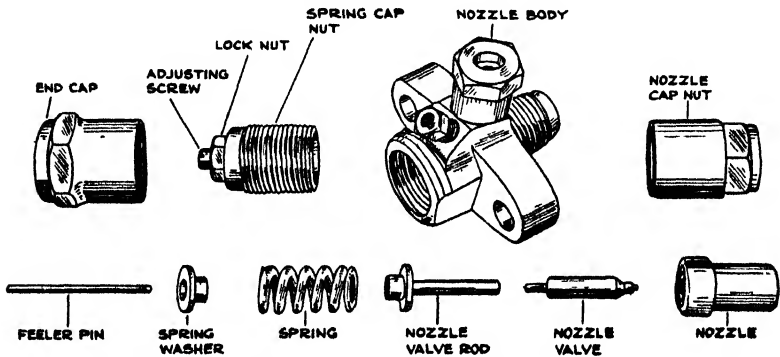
Showing Component Parts of Bosch Injection Nozzle.
